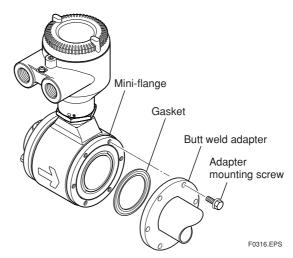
Removing and Installing a Butt Weld Adapter
